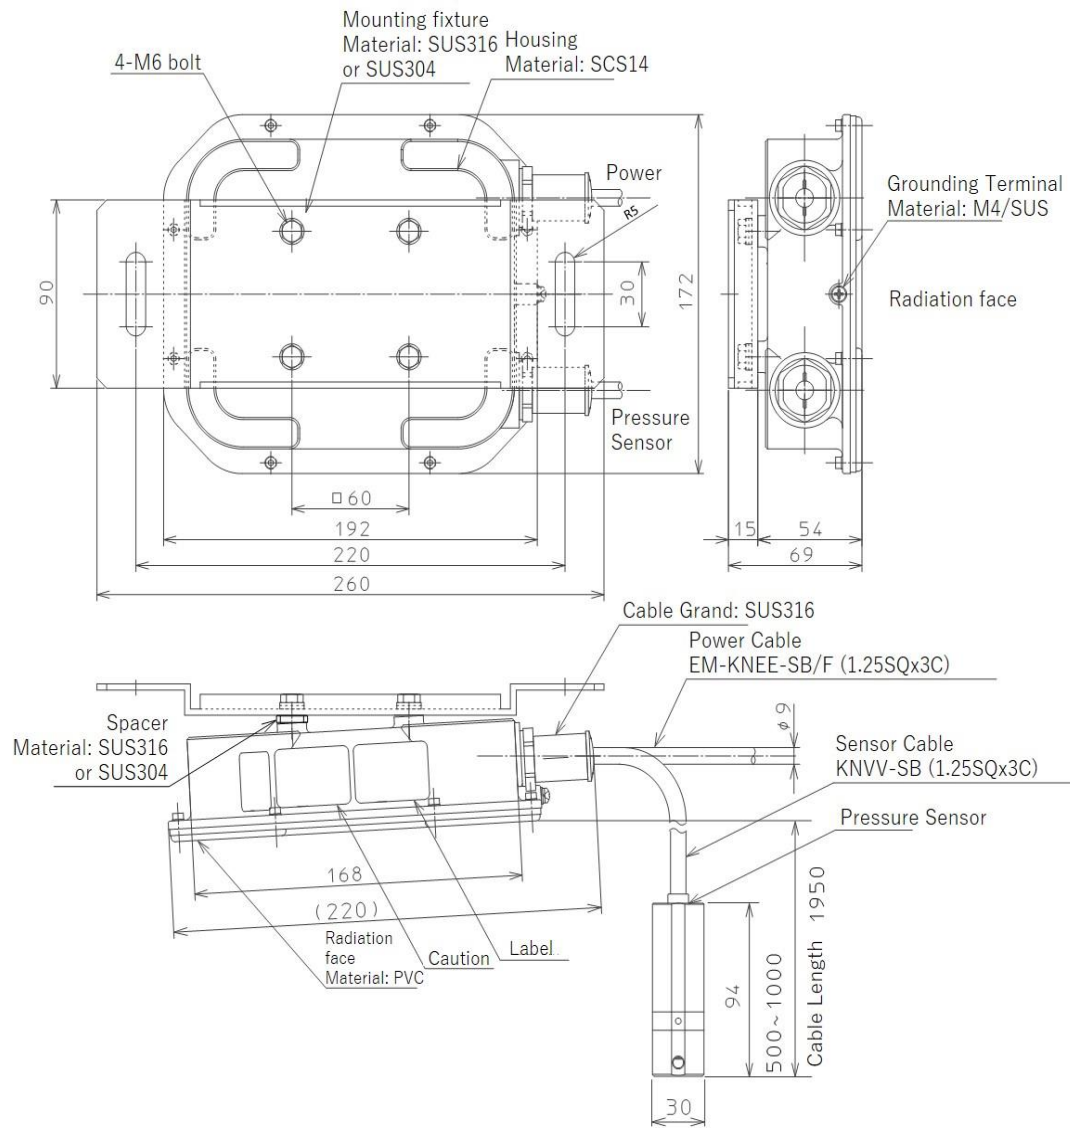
Dimension (With Ceiling Mounting Fixture)
